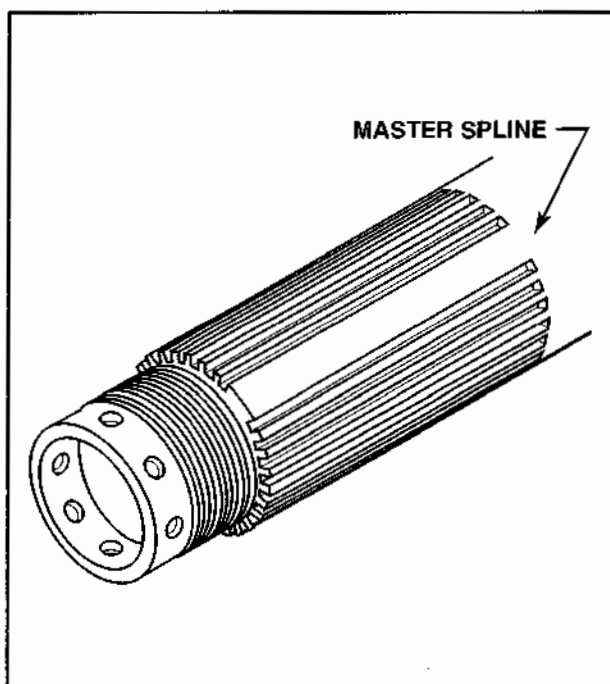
The master spline ensures that a propeller is correctly positioned when installed on the engine.
